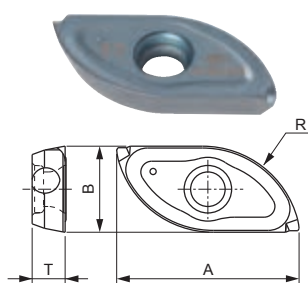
(Main blade for welded & hardened steel) Fig. 4 (Sub blade for welded & hardened steel)
